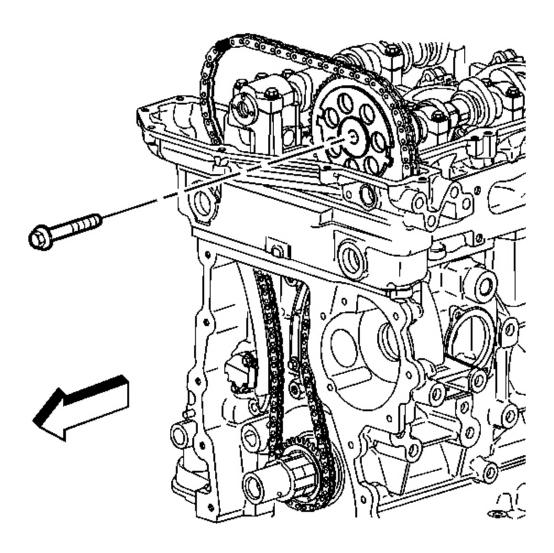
View Of Intake Camshaft Sprocket Washer & Bolt Courtesy of GENERAL MOTORS CORP.
